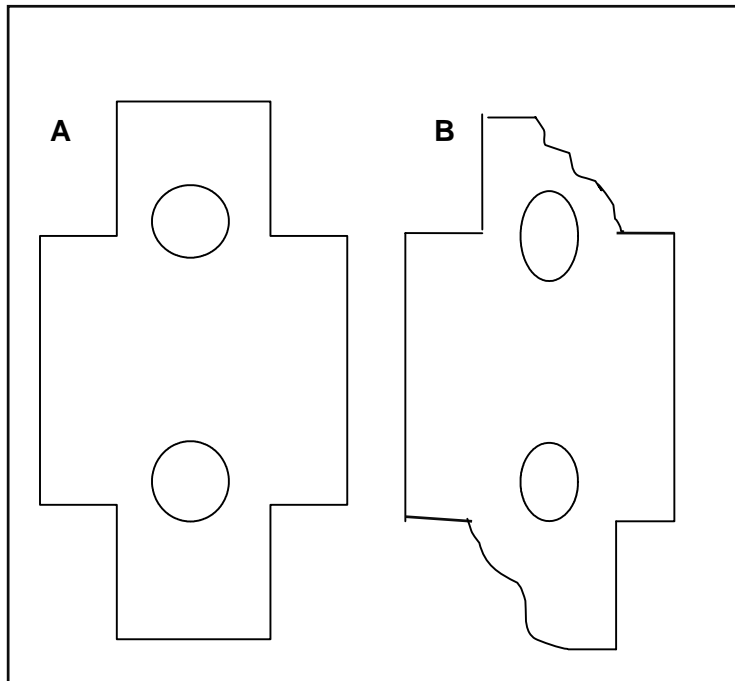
A) New hammer and B) Worn hammer from a hammer mill. (P.Tibasiimwa)
